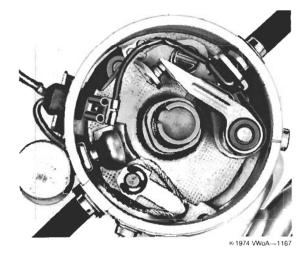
Breaker points installed in the distributor. The point assembly's wire can be pulled off the connector at the left side of the distributor housing.
